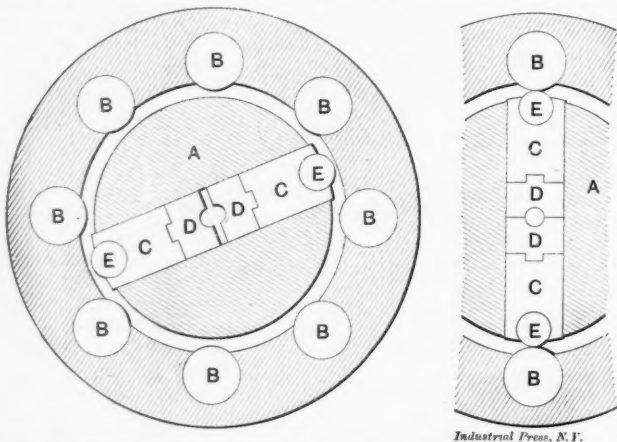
Diagram Illustrating Principle of the Rotary Swaging Machine.
